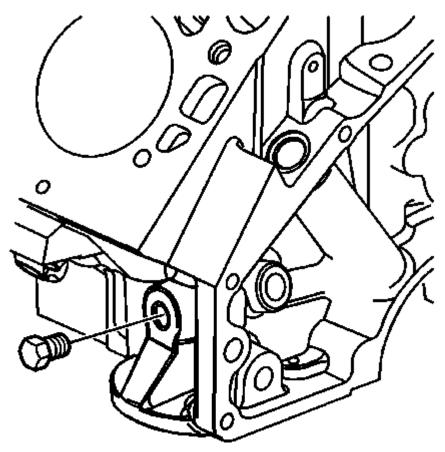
View Of Engine Block Left Oil Gallery Plug Courtesy of GENERAL MOTORS CORP.
